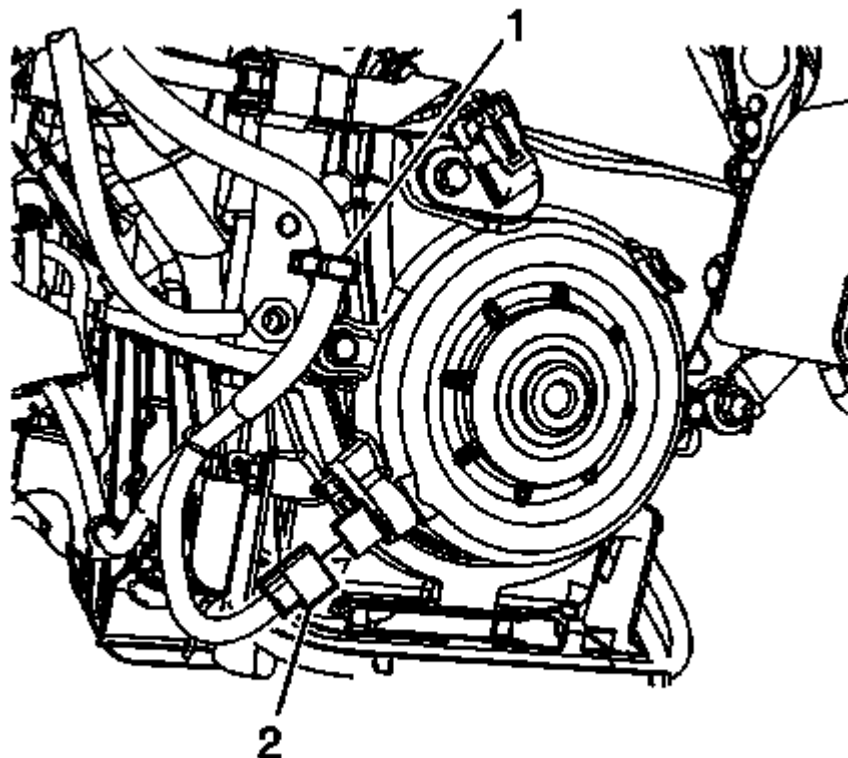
Identifying Crankshaft Position (CKP) Sensor Electrical Connector & Clip
